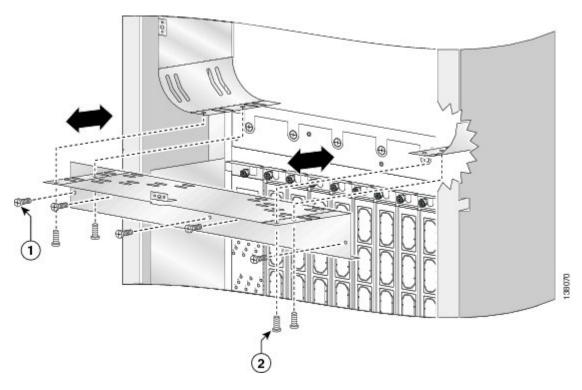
Removing the Rear Upper Horizontal Cable Guide
